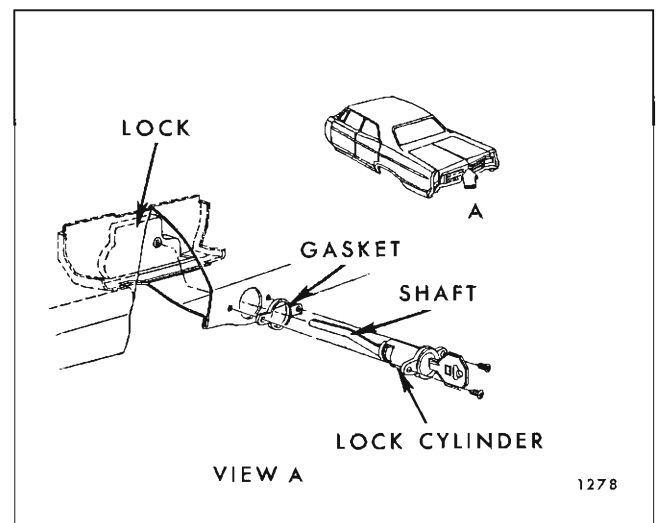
F12—Rear Compartment Lid Lock Cylinder Assembly
